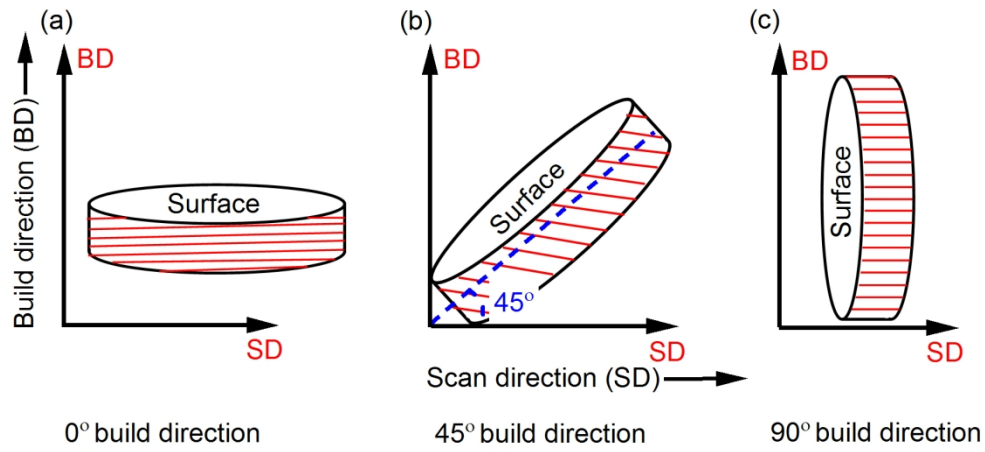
Schematic diagrams depicting the laser scanning strategies used in the manufacturing of SLM 316L stainless steel samples.
